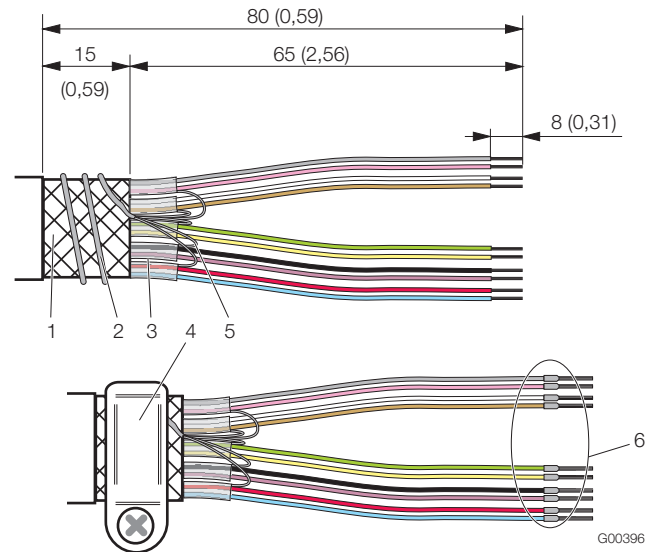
Signal cable assembly, dimensions in mm (inch)
